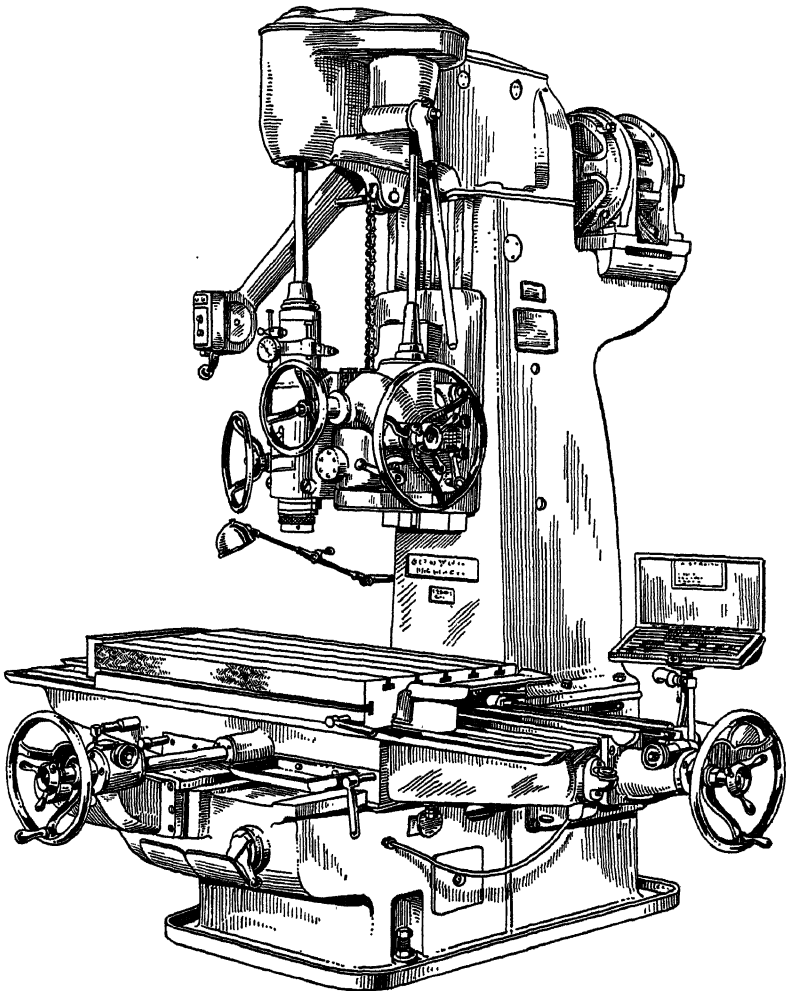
Jig borer. (Courtesy of Pratt and Whitney.)
